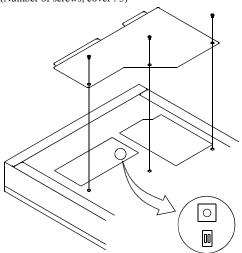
Removal of Cover and Heat Sink and Locations of CMOS/ROM Clear Jumpers
